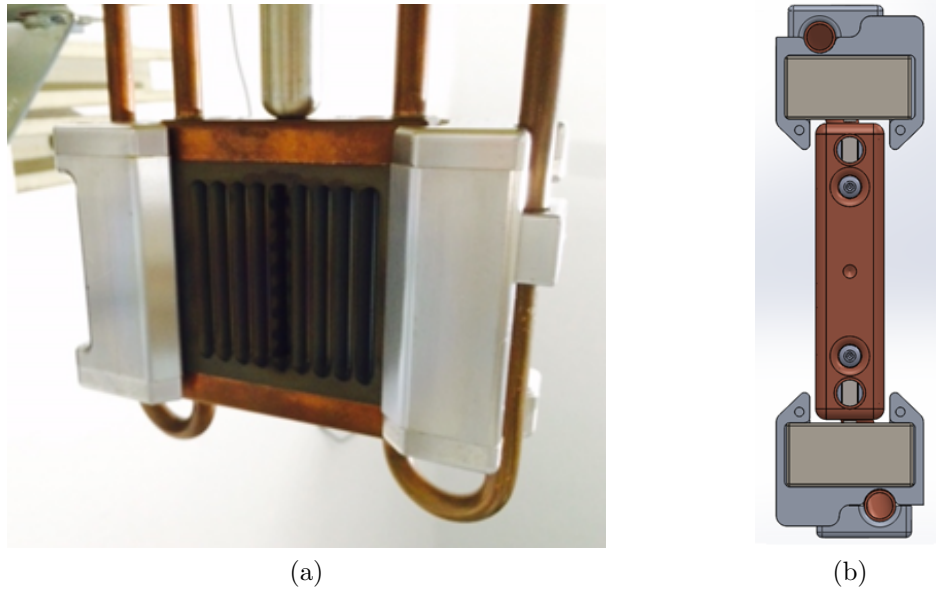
Neodymium magnet holders. (a) Photo of the magnet holders clamped to target cooling tubes. (b) CAD drawing, top view, showing neodymium magnets.
